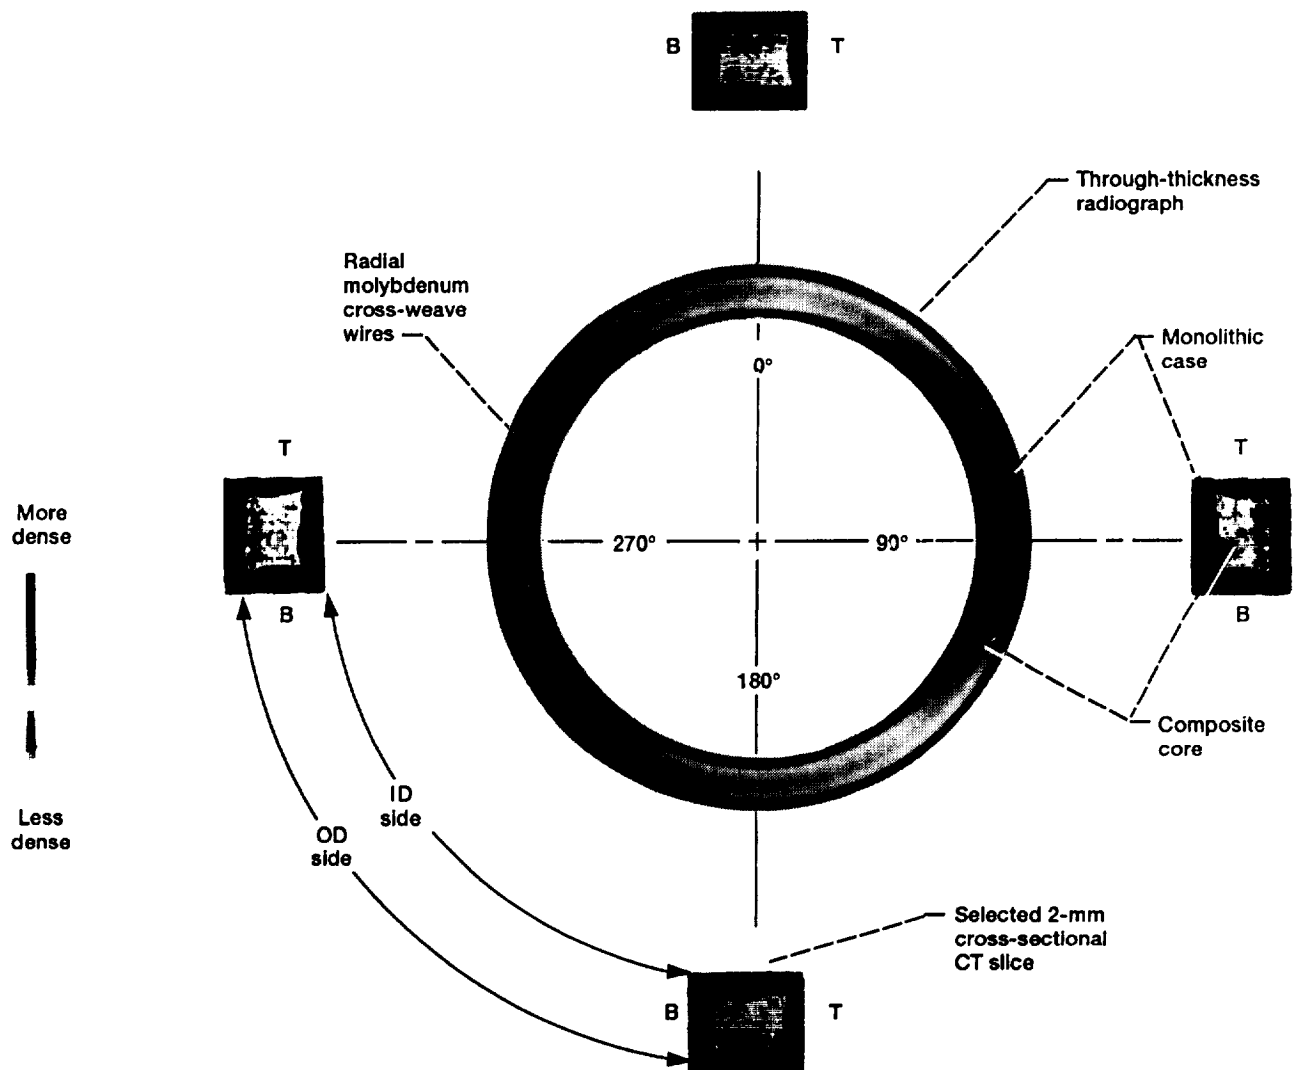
Radiography and x-ray computed tomography of ring R3. (Annulus dimensions: outside diameter, 171 mm; inside diameter, 133 mm; thickness, 24 mm. Annulus materials, SCS-6/TI-15V-3Cr-3Al-3Sn. T is top side; B is bottom side.)
